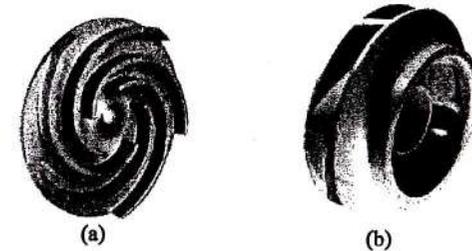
(a) An open impeller and (b) an enclosed or shrouded impeller
